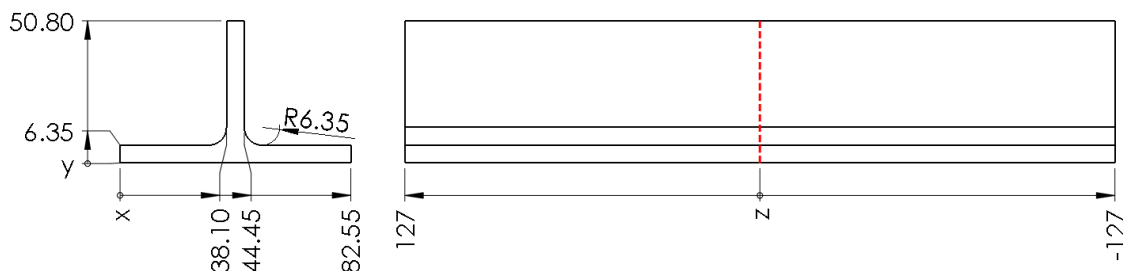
Aluminum T-section dimensions and measurement location (dimensions in mm)
